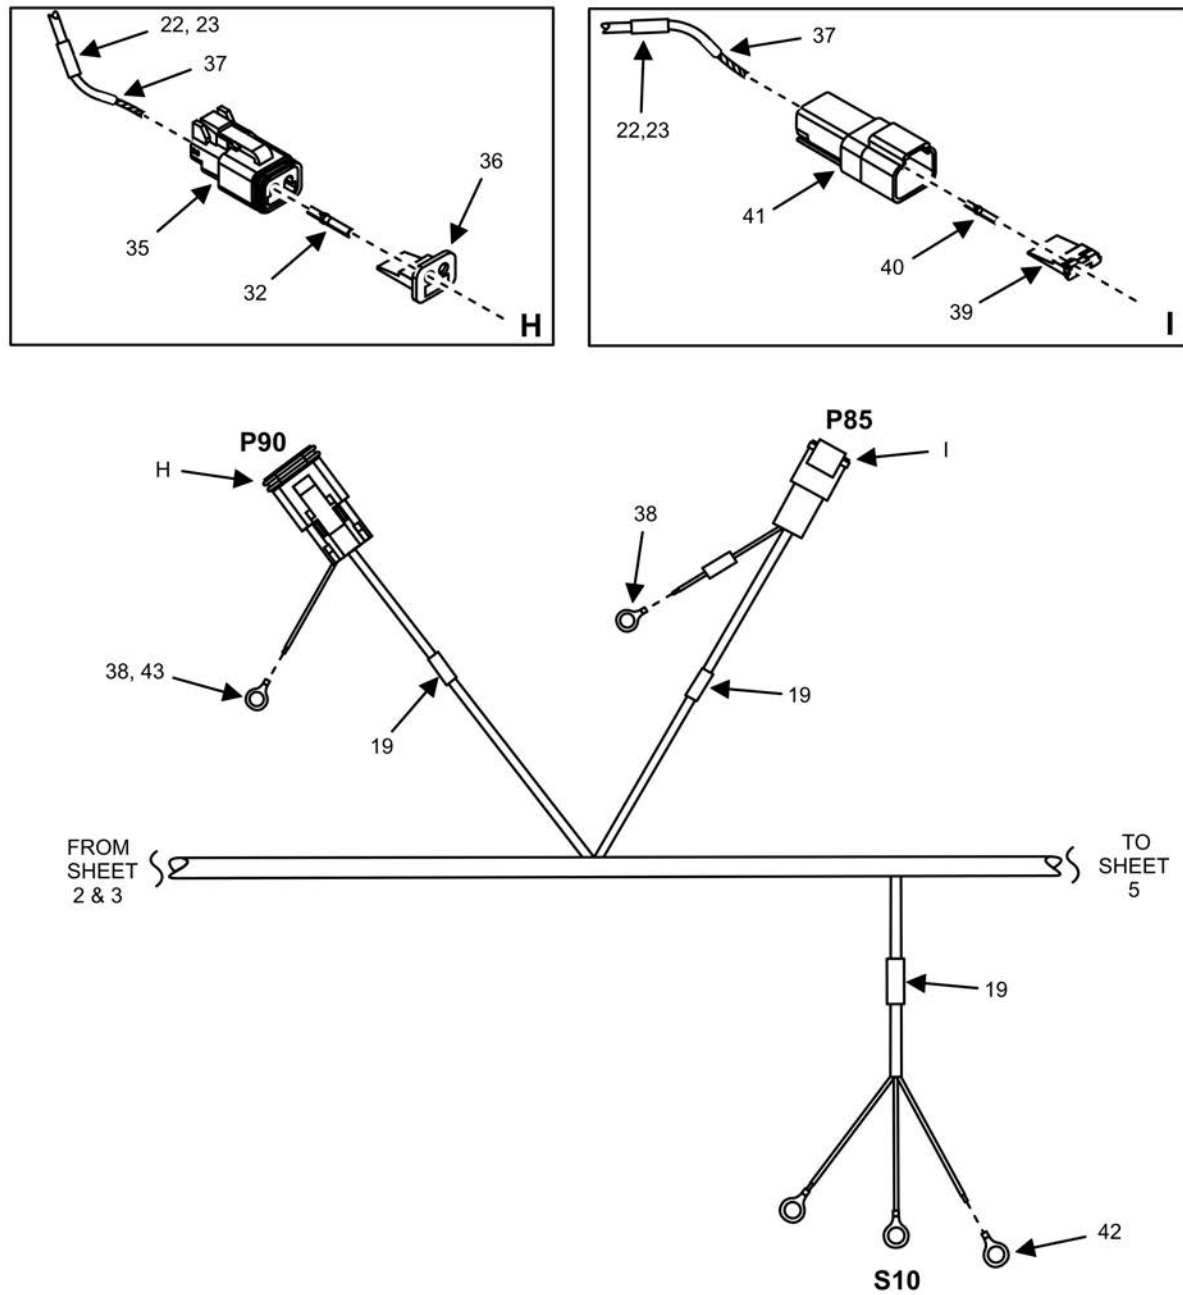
Engine Wiring Harness (Sheet 3 of 19).
